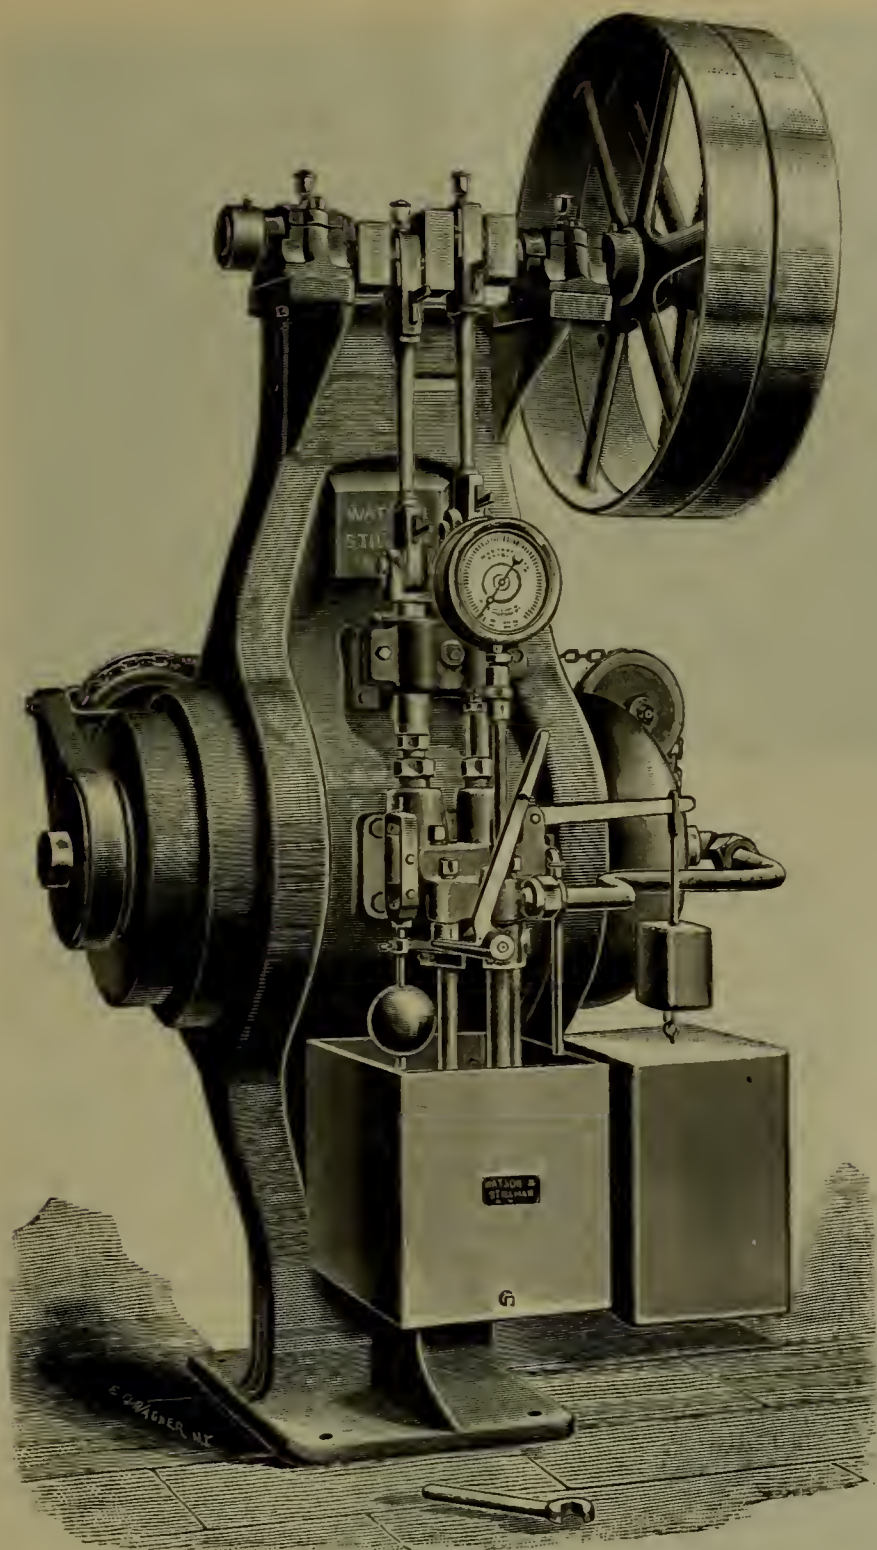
HYDRAULIC CAR WHEEL PRESS.
